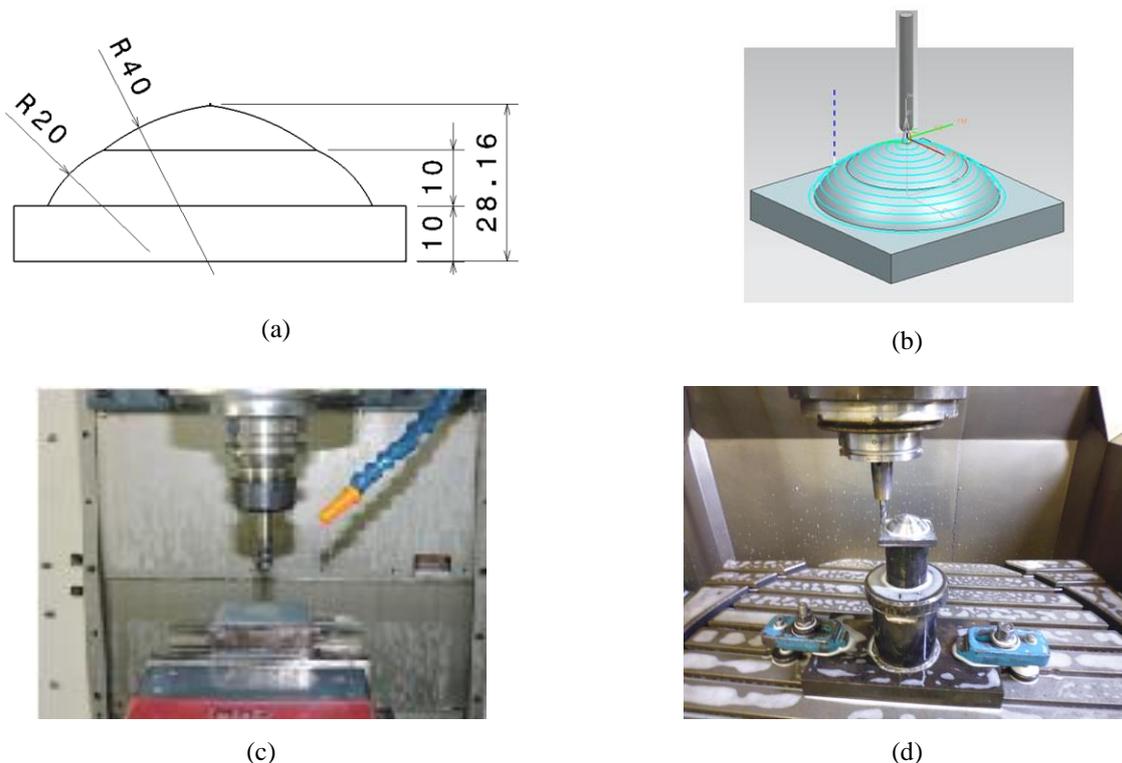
(a) CAD draw of hemispherical surfaces (dimensions in mm), (b) tool path, (c) Part fastened and machined in machine A, (d) Part fastened and machined in machine B.
